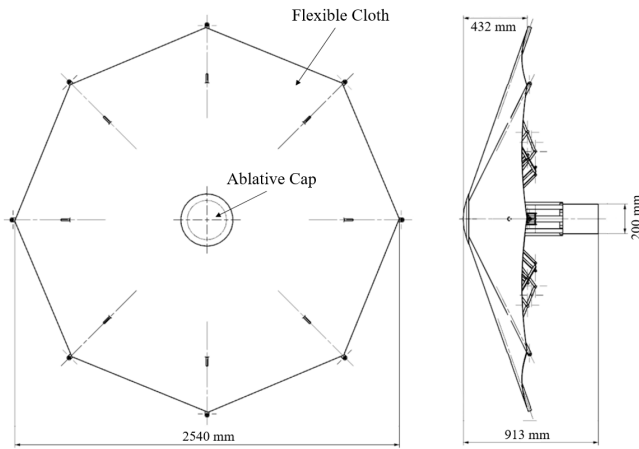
Technical drawing representation of the DLR MML with decelerator deployed, TPS system and with dimensions.
